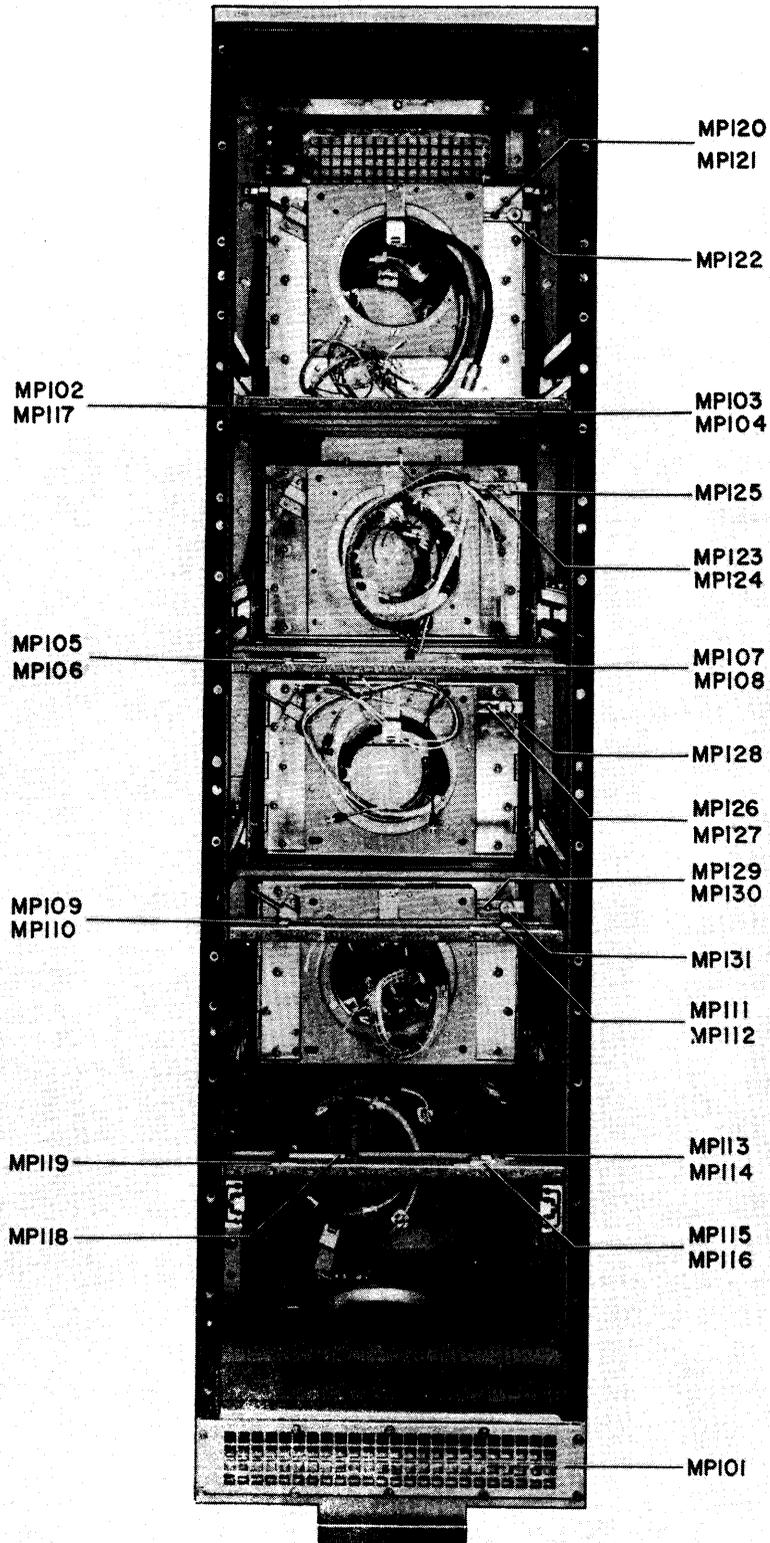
Electrical Equipment Cabinet CY-2558/WRT-2, Replaceable Mechanical Parts
